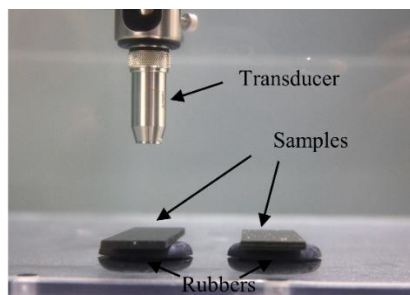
Ultrasonic immersion setup used for pulse-echo inspection, showing the transducer, CFRP samples, and rubber spacers used to lift the samples from the tank surface inside the immersion tank.
